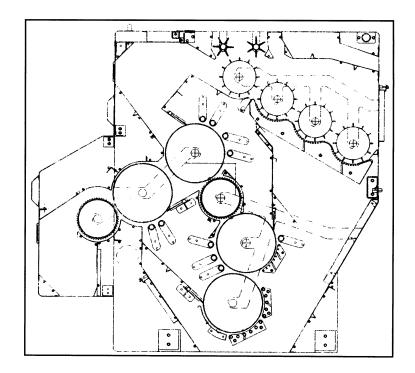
Extractor feeder equipped with cleaning and extracting cylinders feeding a saw gin stand (courtesy of Consolidated Cotton Gin Co., Inc.)
